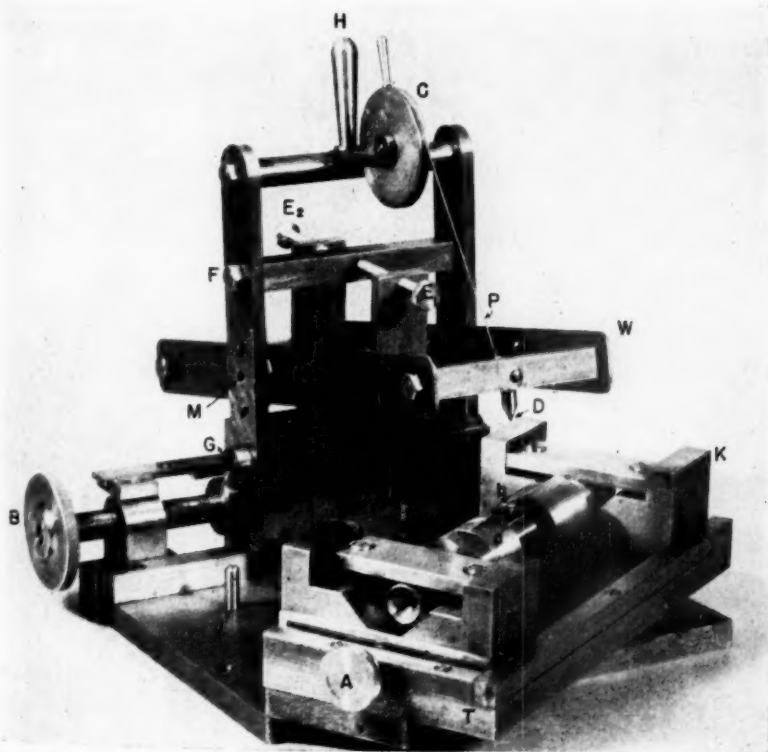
Jig for Engraving Reference Marks on Platinum Surfaces of Creep-Extensometer Units.
